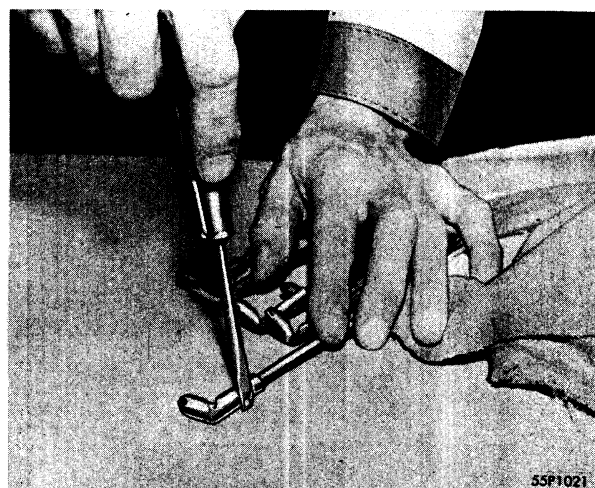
Bending Locking Tab to Remove Clip from Bow
